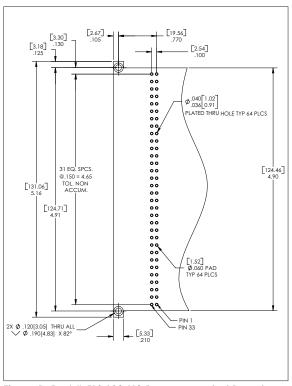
Figure B. Part # 510 108 112 Recommended Board Layout. Solder Side Shown.
